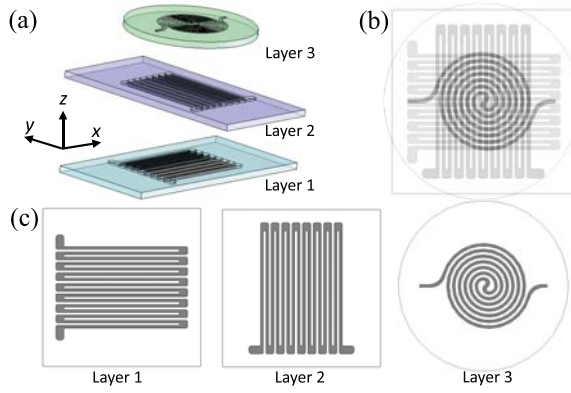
Design of the three sensor layers with embedded microchannels. (a) Exploded view. (b) Assembled view. (c) Each sensor layer design (Layer 1: x -axis strain sensing, Layer 2: y -axis strain sensing, and Layer 3: z -axis pressure sensing).
